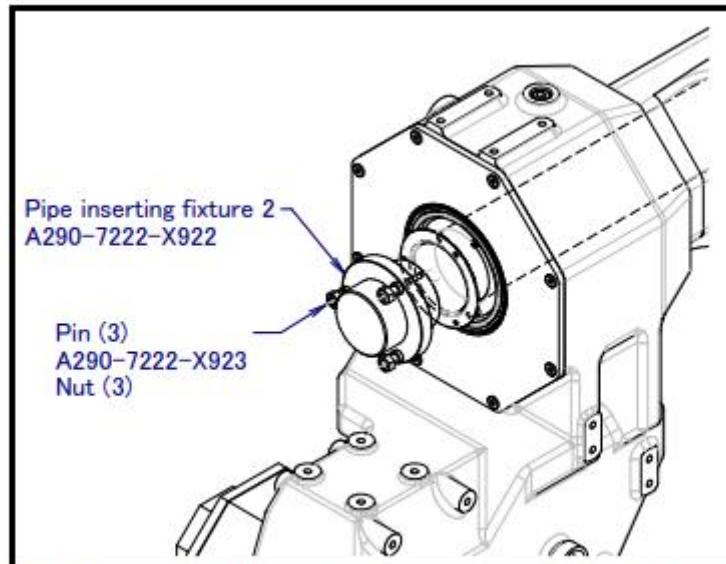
(h) Replacing the J4-axis gearbox, assembling pipe inserting fixture 2
